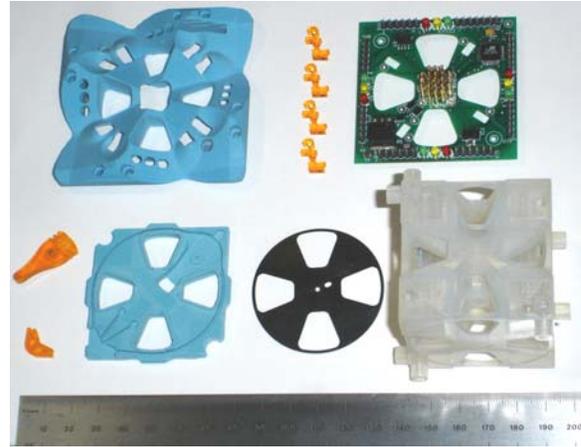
Robot components. From left to right starting with top row: robot interface, latching hooks, PCB, valve driving lever and SMA wire retainer with crimp holders, valve mechanism body, valve shutter, robot core manifold.
